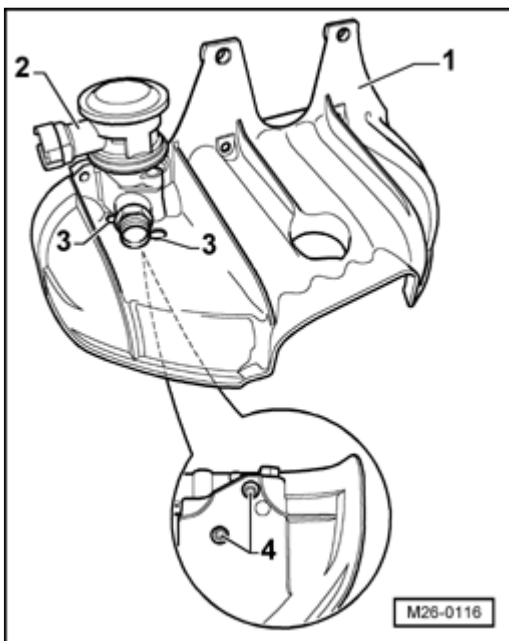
Warm Air Collector Plate, Bolts, Combination Valve & Holes
